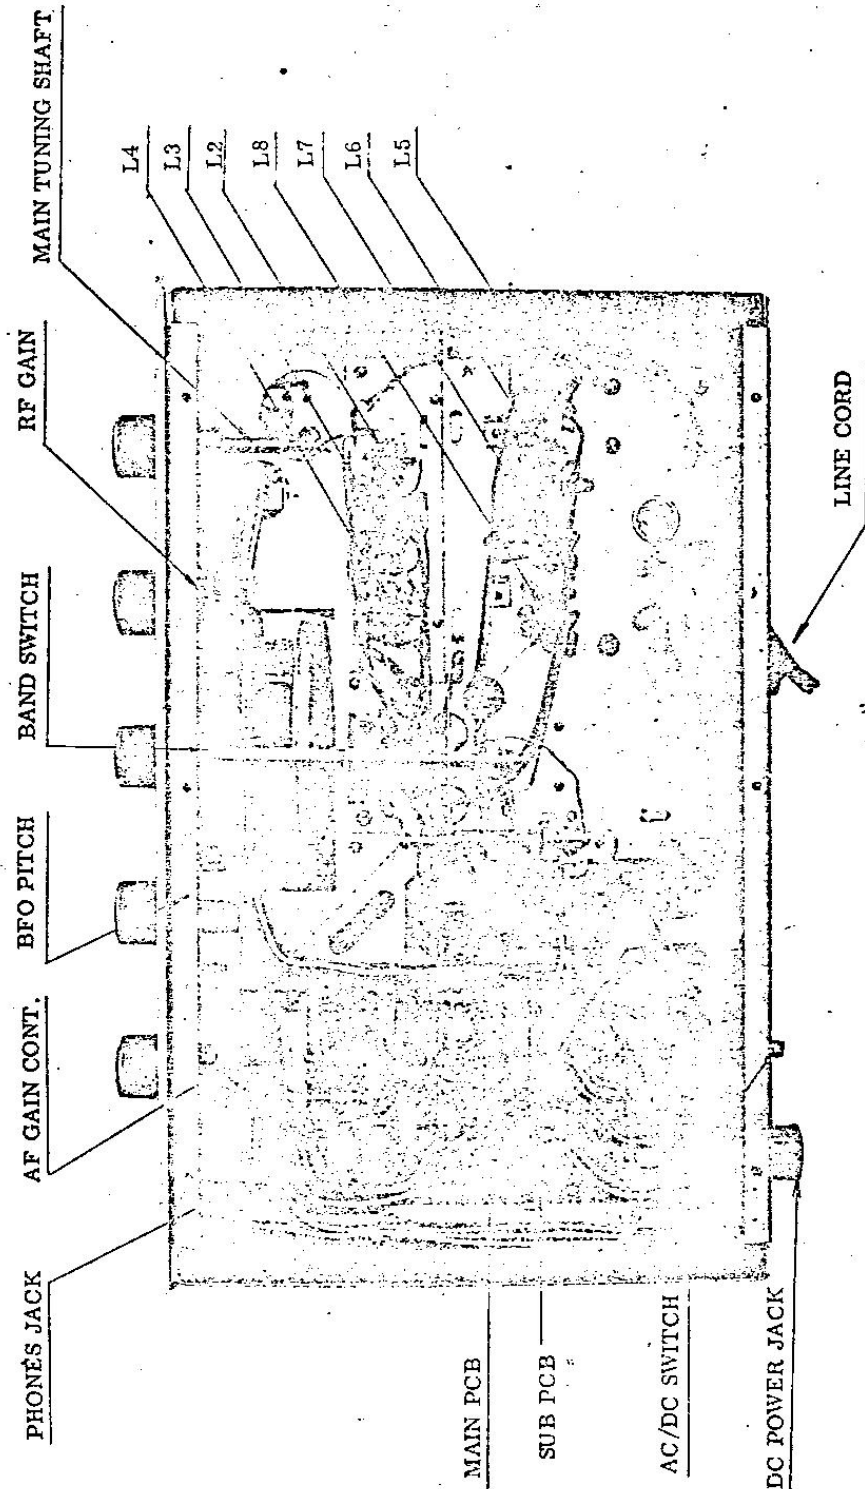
REAR VIEW OF DX-120 CHASSIS PARTS LOCATION
